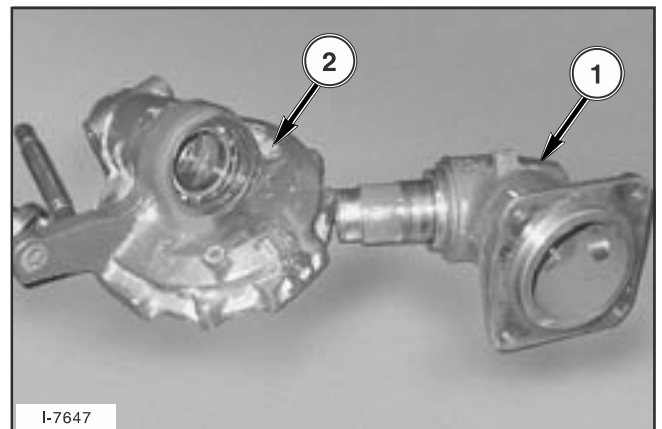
A-40: Remove bevel gear (17T) and bearing.
